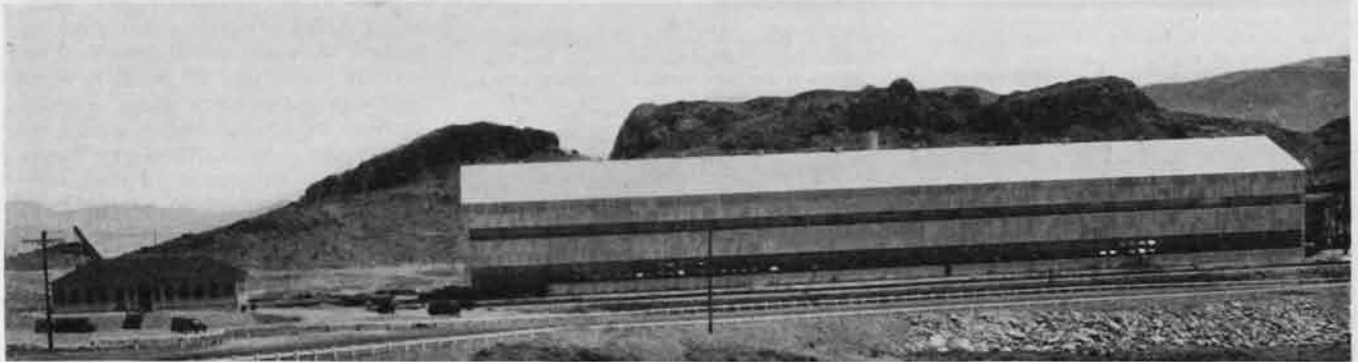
Steel plate enters one end of this completely equipped fabricating plant in sheets and emerges at the other end as welded pipe sections, some of 30 ft. in diameter, thoroughly inspected and tested. Plant, located near rim of canyon, provides for straight-line operation. Pipe contractor's office building is at left.
